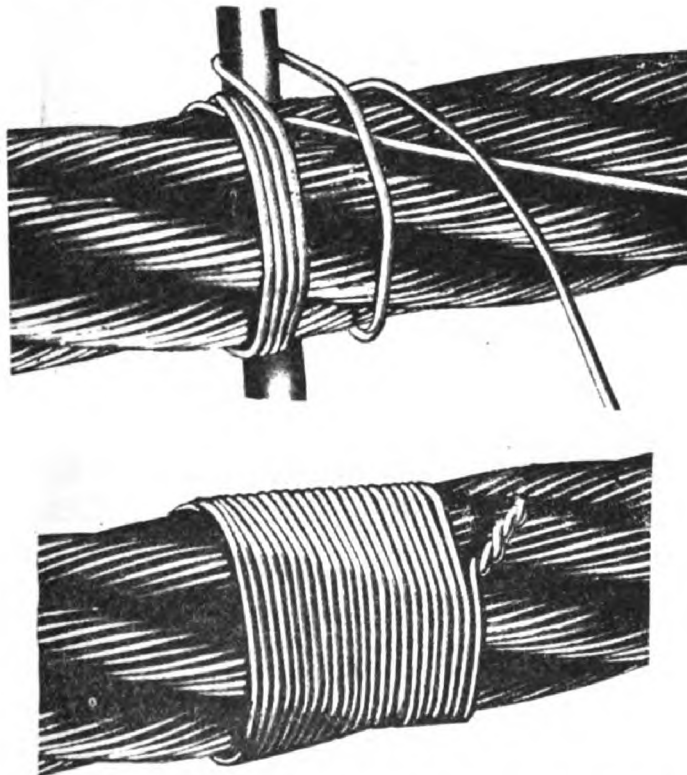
Seizing Wire Rope, Finish on End of Seizing.
